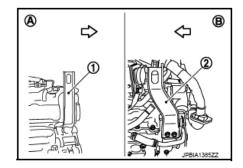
Locating Engine Front And Rear Slingers Courtesy of NISSAN NORTH AMERICA, INC.
